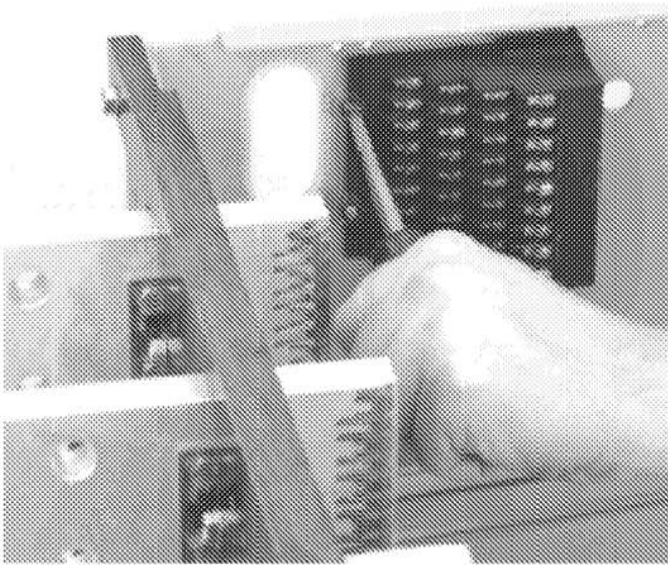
Installing the screws and spacers holding the Secondary Disconnect block against the enclosure side wall.
